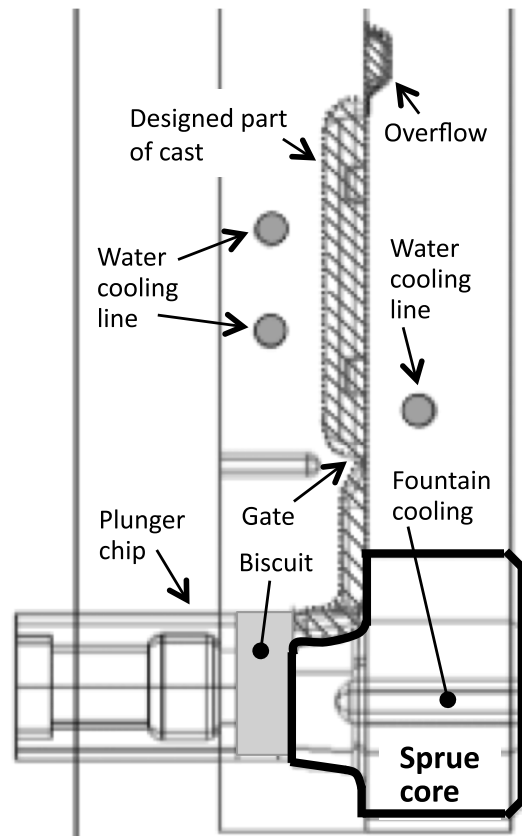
Side view of a die casting apparatus. A sprue core with a built-in fountain cooling system holds a biscuit pressured by a plunger chip. The diameter of a biscuit contacting face "A" of the sprue core is 50 mm.
